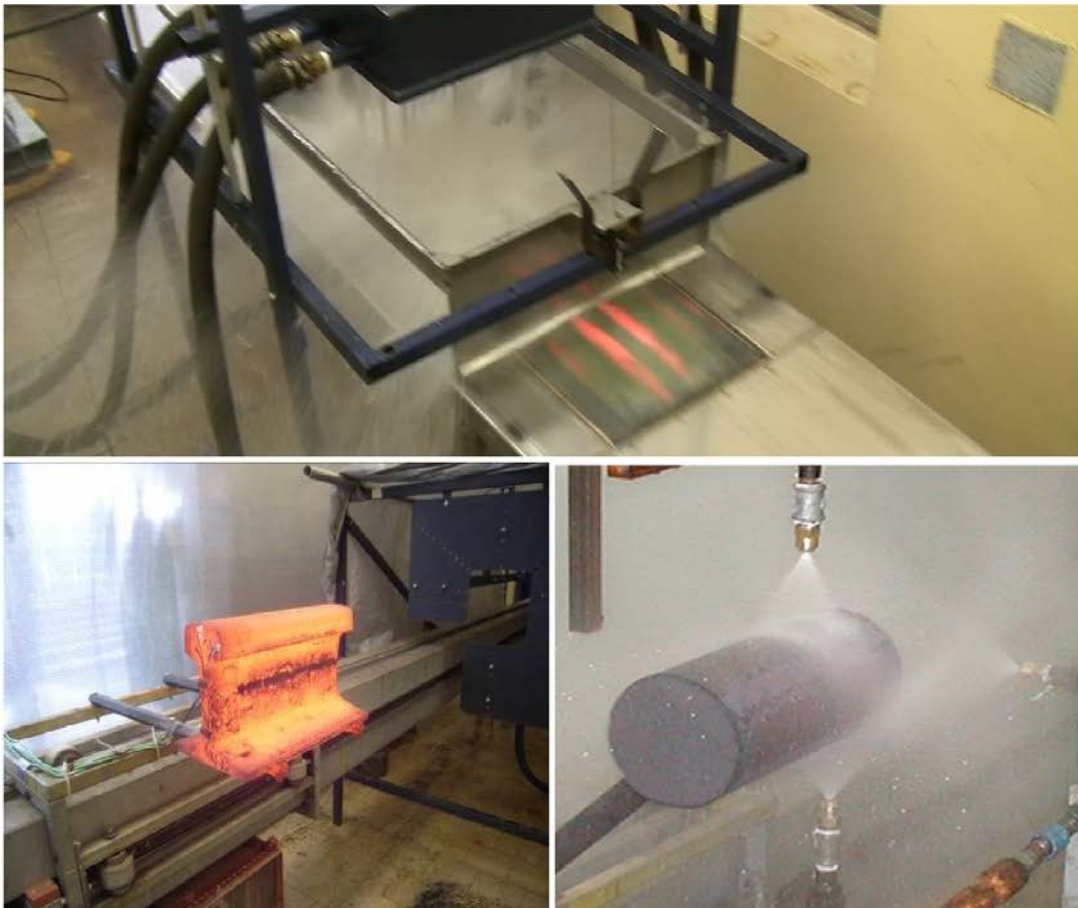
Examples of boundary conditions measurements on steel plate, rail, and pipe.
